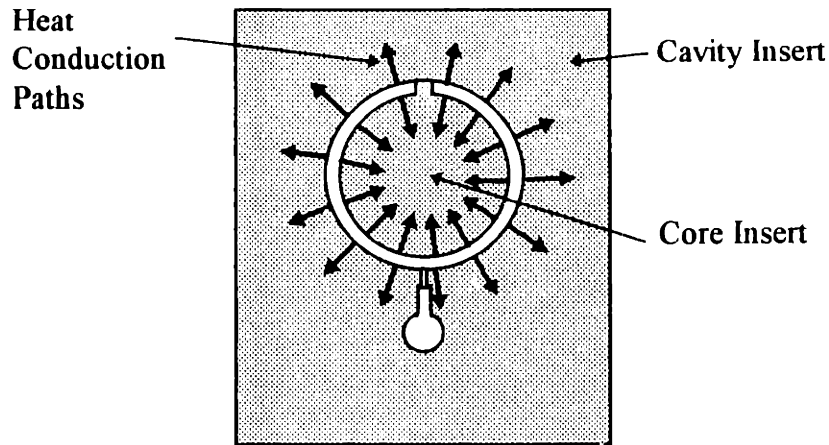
Cross section of the core and cavity mold pair forming the mold cavity. Arrows indicate the heat conduction paths in the cavity and the core inserts.
